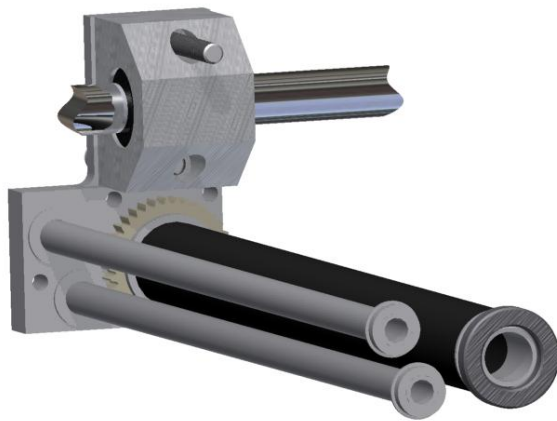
A CAD model of the redesigned consolidation carriage with parts removed to view the peel rollers.
